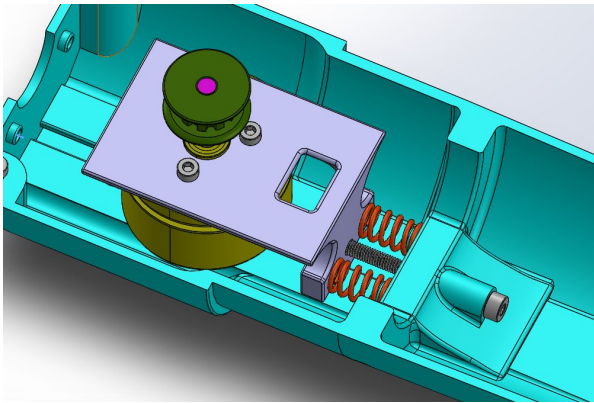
Close up of the linear belt tensioning mechanism showcasing the motor mount interfacing with the two tension springs and the tensioning screw.
